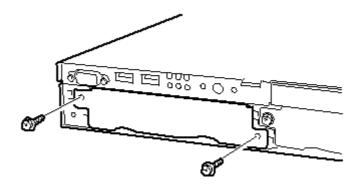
4: Removing the Screws Securing the Drive Carrier
